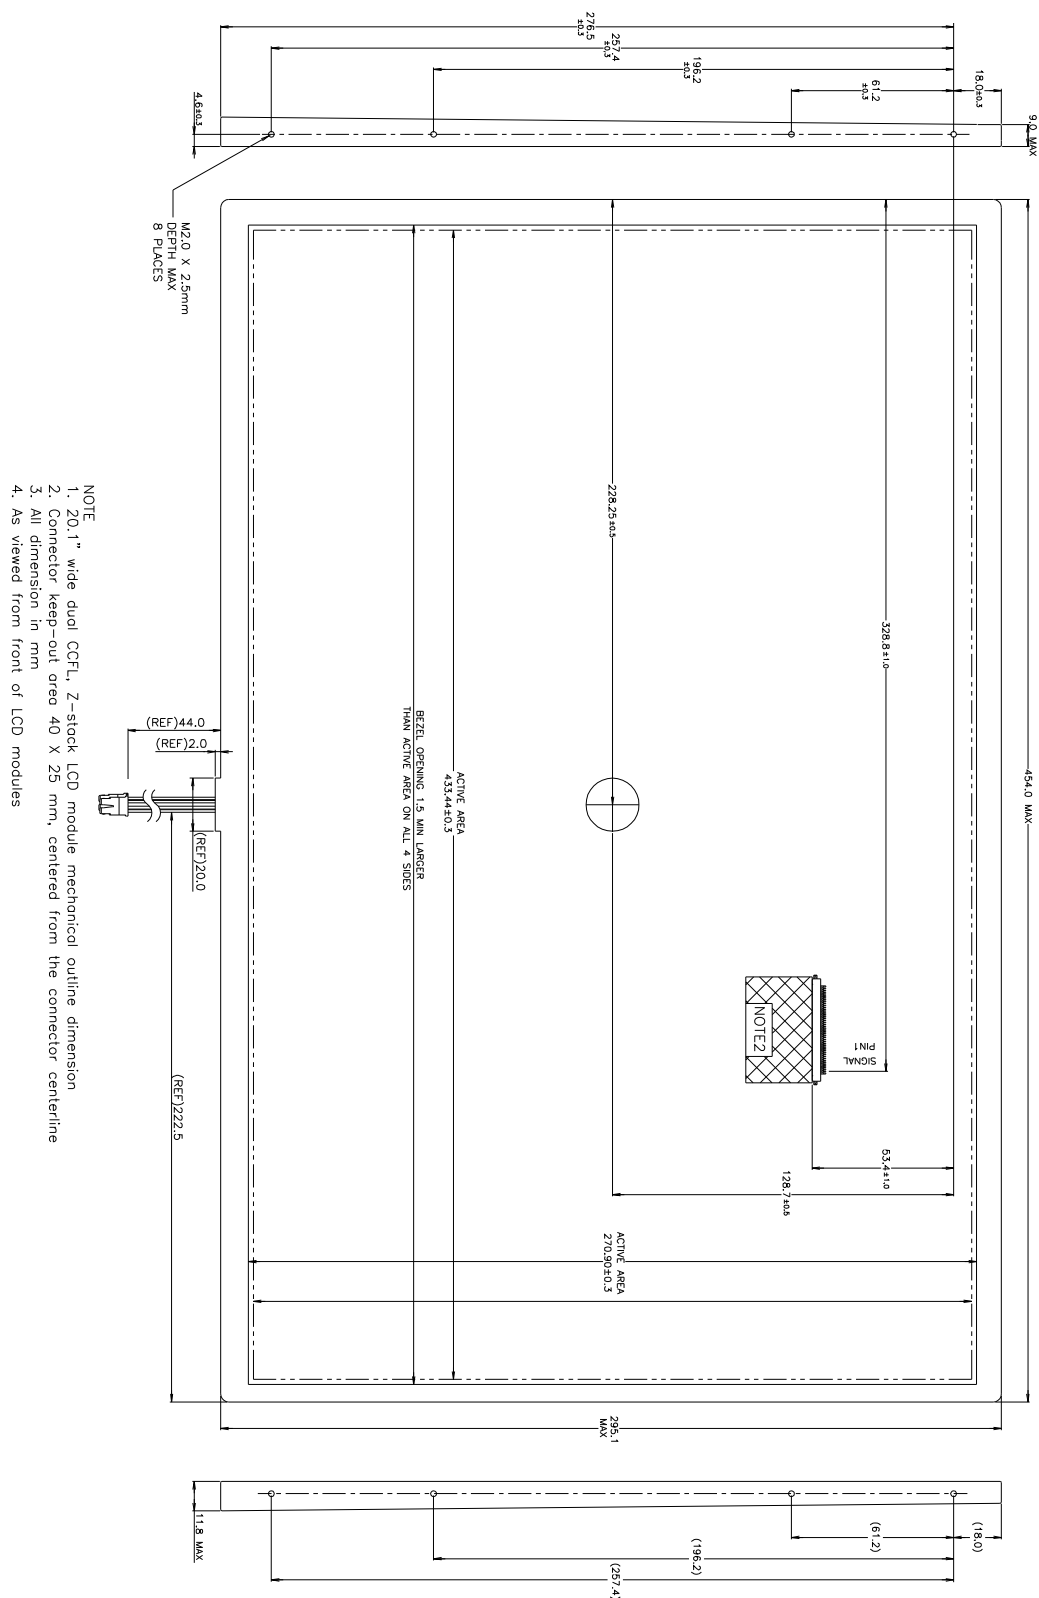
20.1-inch Wide Dual CCFL, Z-stack Mechanical Outline Dimension (Front View)
